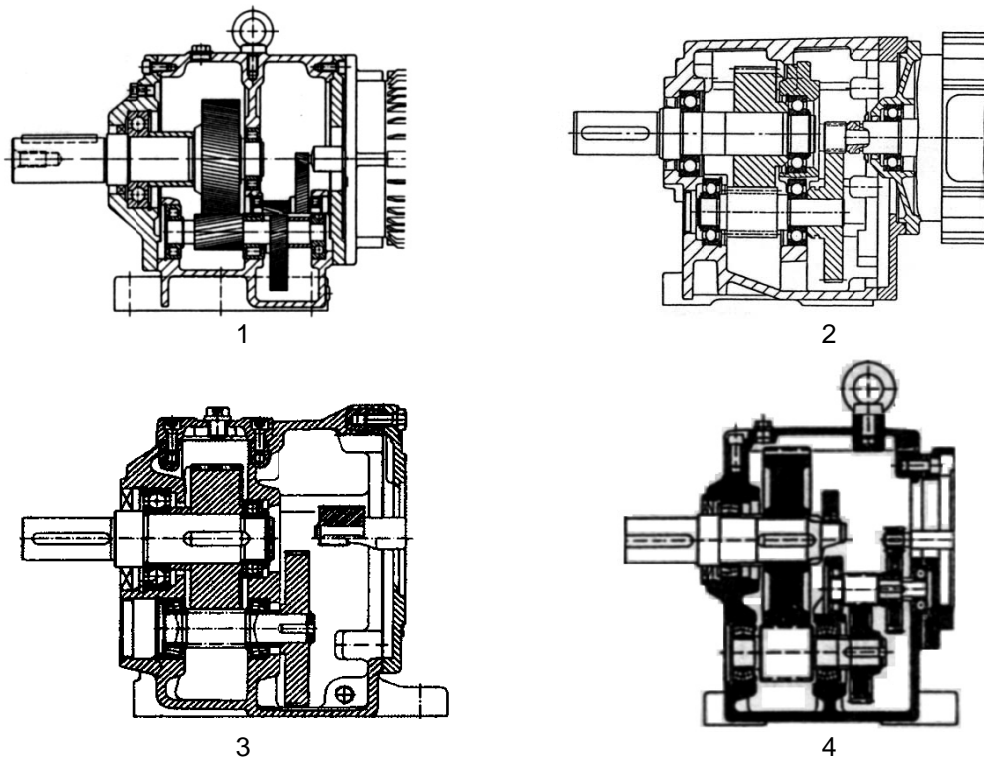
Typical mounting solutions: (1) frontal mounting of gear wheel (Horz), (2) mounting of gear wheel from the back side (Lenze), (3) mounting of gear wheel from the back and top side (Nord) and (4) mounting of gear wheel from the top side (Nord)
